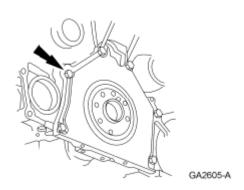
Applying Bead Of Gasket Maker To Crankshaft Rear Seal Retainer Plate Mating Surface
